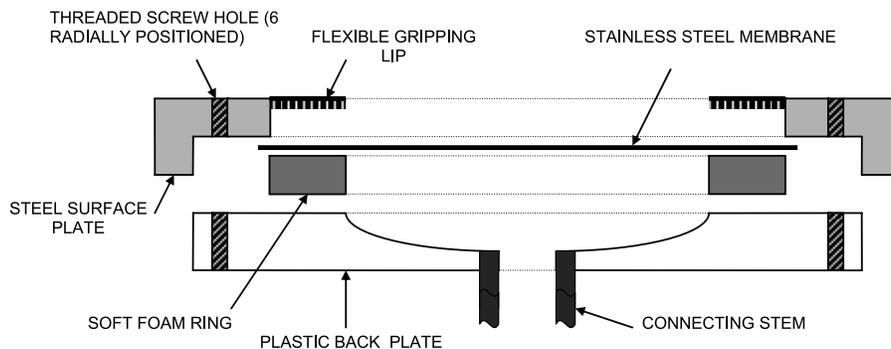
Base plate design showing screw assembly and serrated gripping lip. Note that the compression plate is shown prior to assembly. When assembled, the flexible gripping lip is in firm contact with the membrane, both pressing it against the rubber and holding it from slipping as it is tensioned. The unit used to generate the data shown has an overall diameter of 0.18 m, a contact diameter of 0.090 m, and a thickness of the entire device of 0.028 m.
